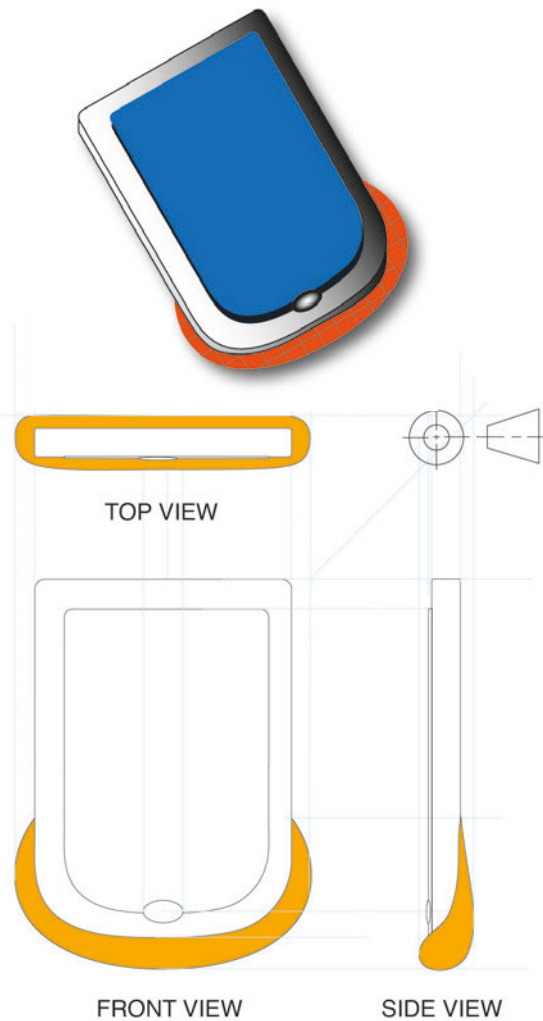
A presentation drawing – third-angle orthogonal drawing, produced in Adobe® Illustrator®
